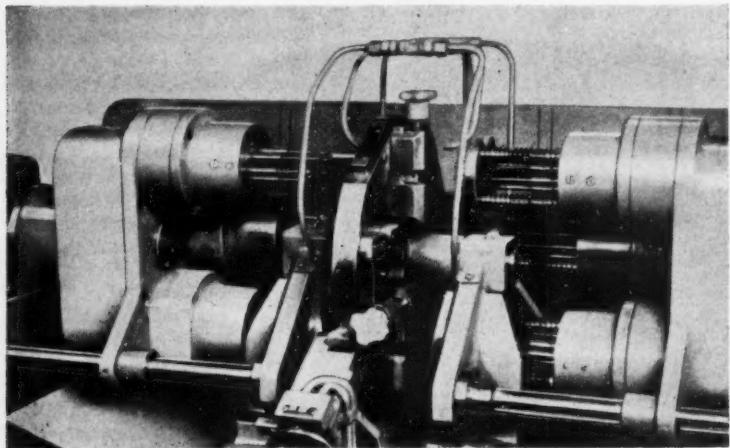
Close-up View of the Spindle Heads and Work Stations of a Machine Designed to Drill 48 Holes in a Plate Component
